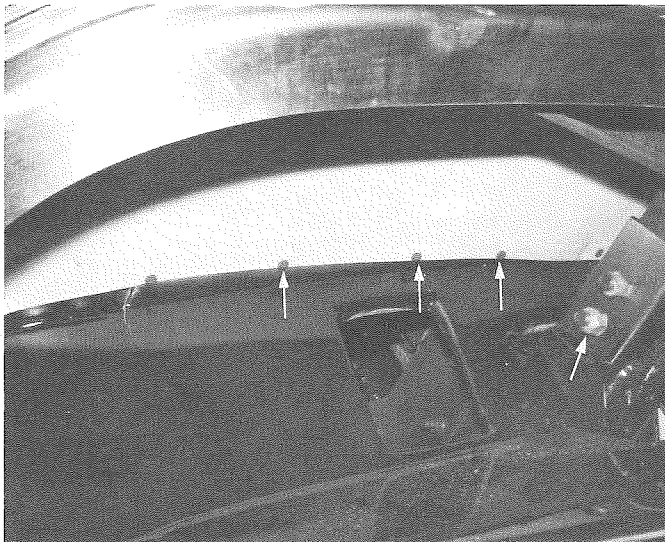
Bumper & Dressout: The bumper dressout panel extends from the main body to the inner edge of the bumper top surface. It has three sections and is fastened to the flange of the main body panel below the bumper. Remove approximately 26 Phillips-head self-tapping screws.
